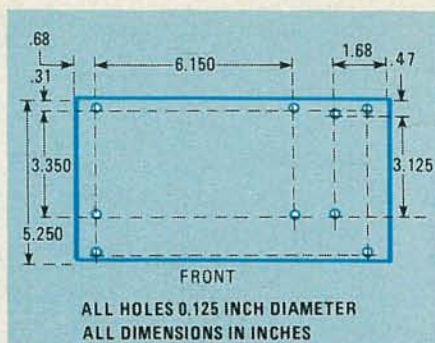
TOP VIEW of the power supply chassis shows the mounting holes for the PC board, transformer, and cabinet feet.
